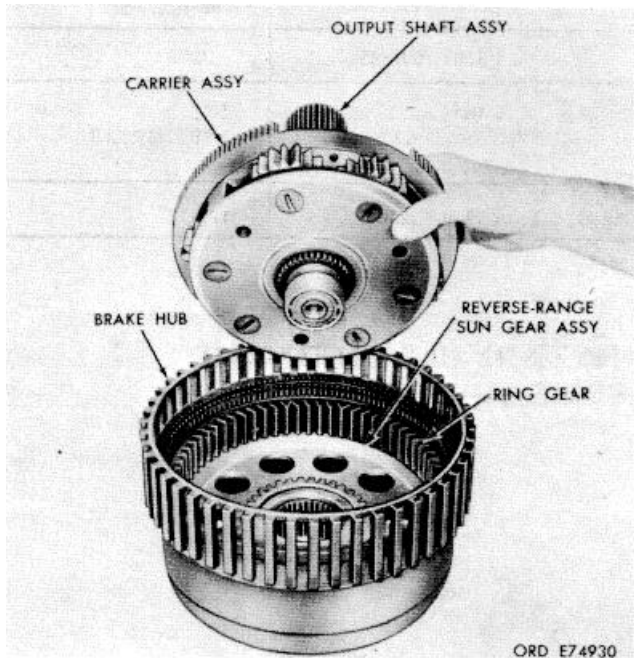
Removing for installing) steer planetary carrier assembly.
